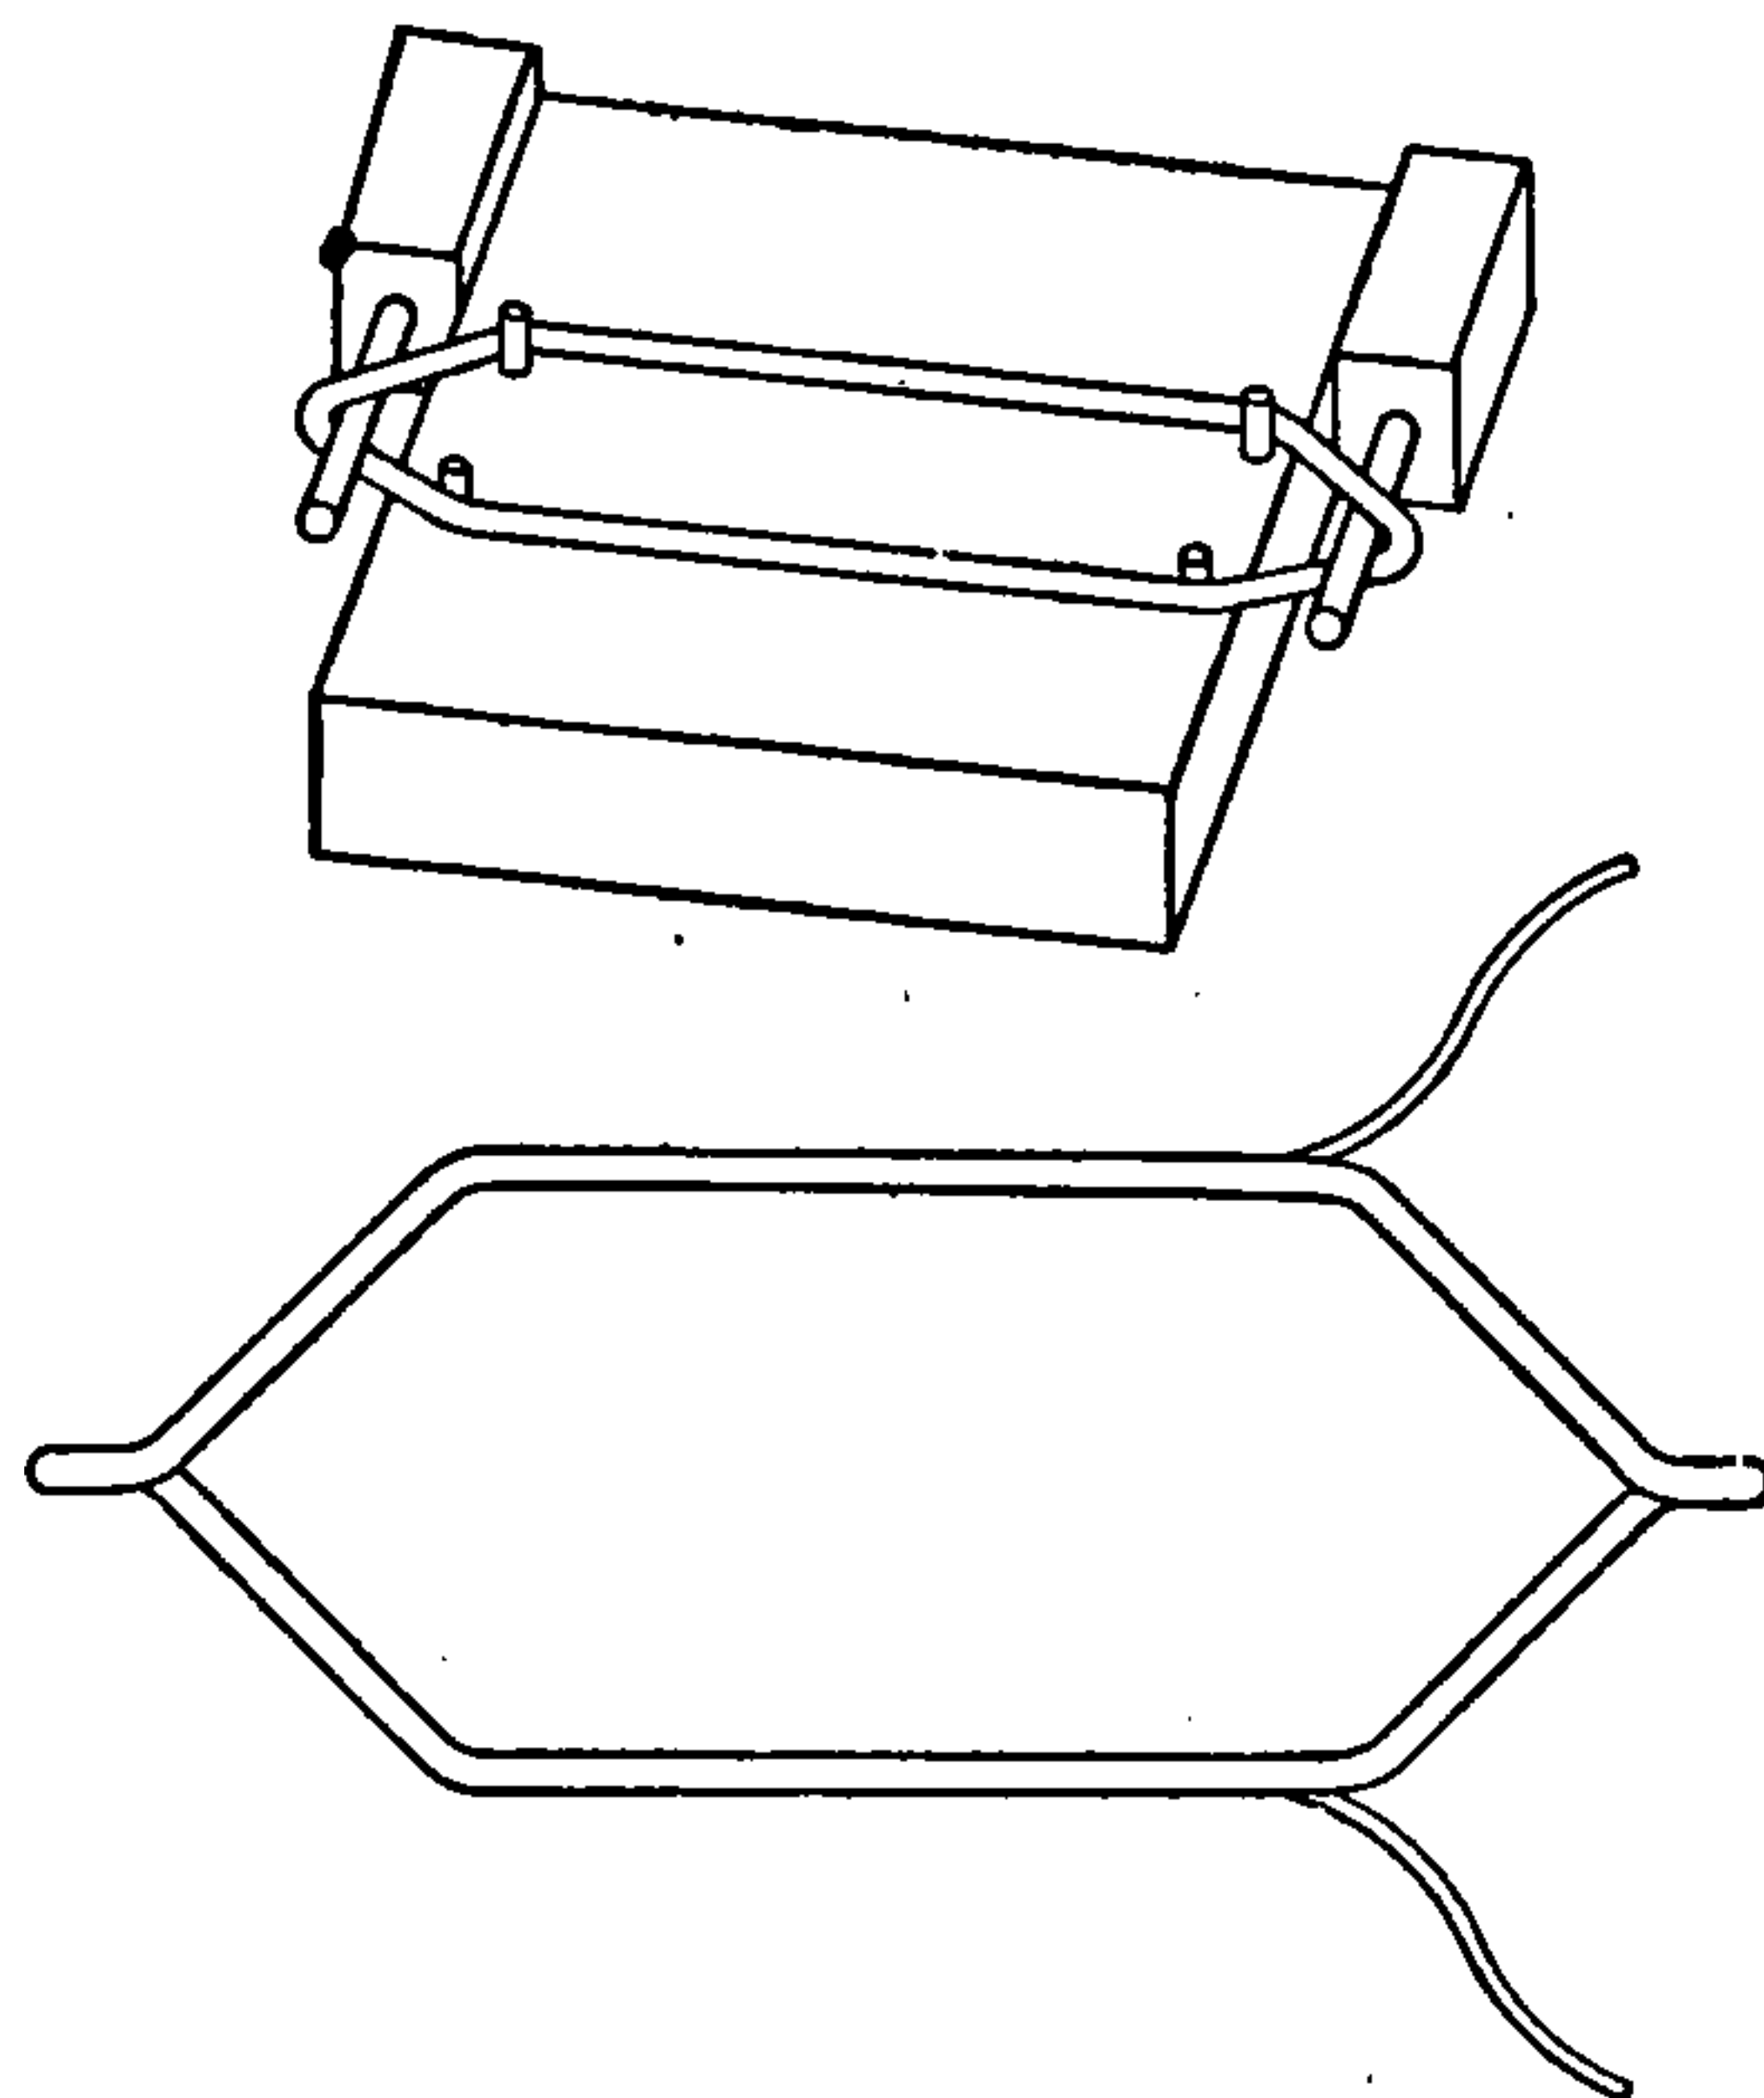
"Straight-Out" Former-Wound Coil, and Coil Opened Out
